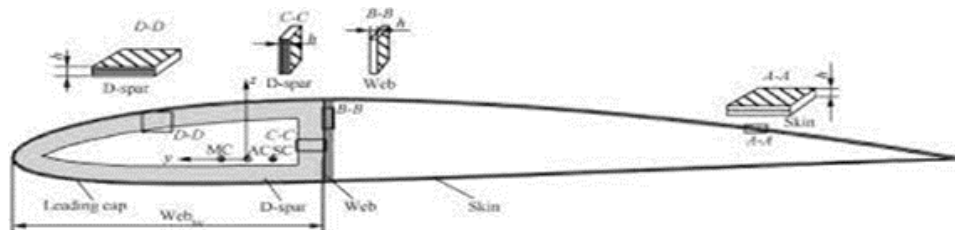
Airfoil shaped rotor blades($C_d=.045$)
